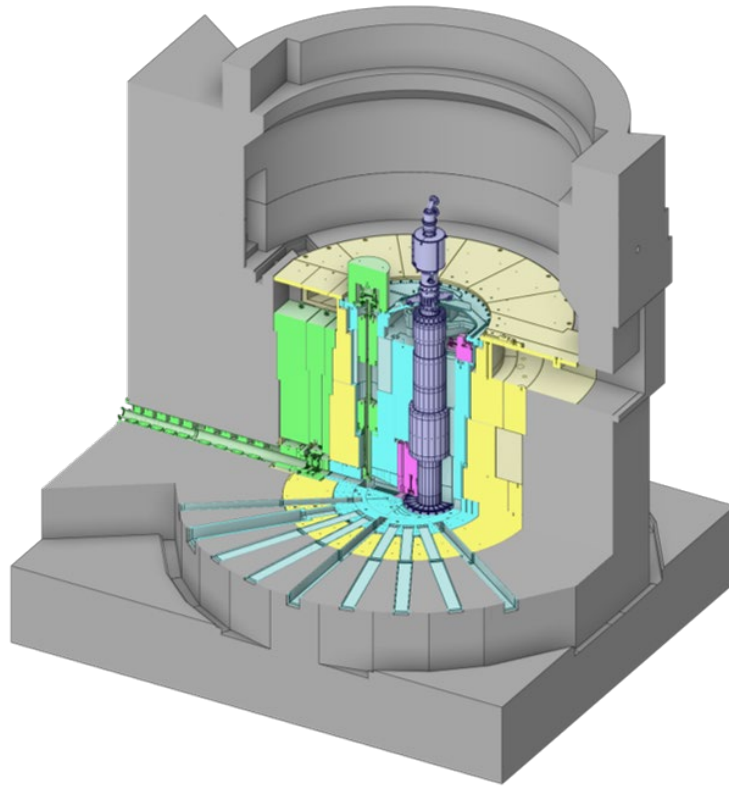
View of Target Assembly installed immediately after rigging into the core vessel
